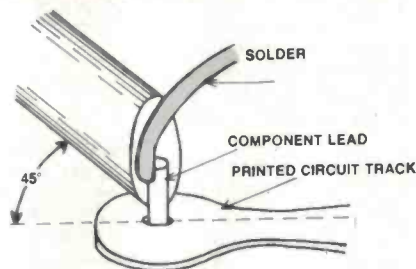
When soldering a component lead to a printed circuit board, apply the iron to the lead with the tip touching the copper track as well.
